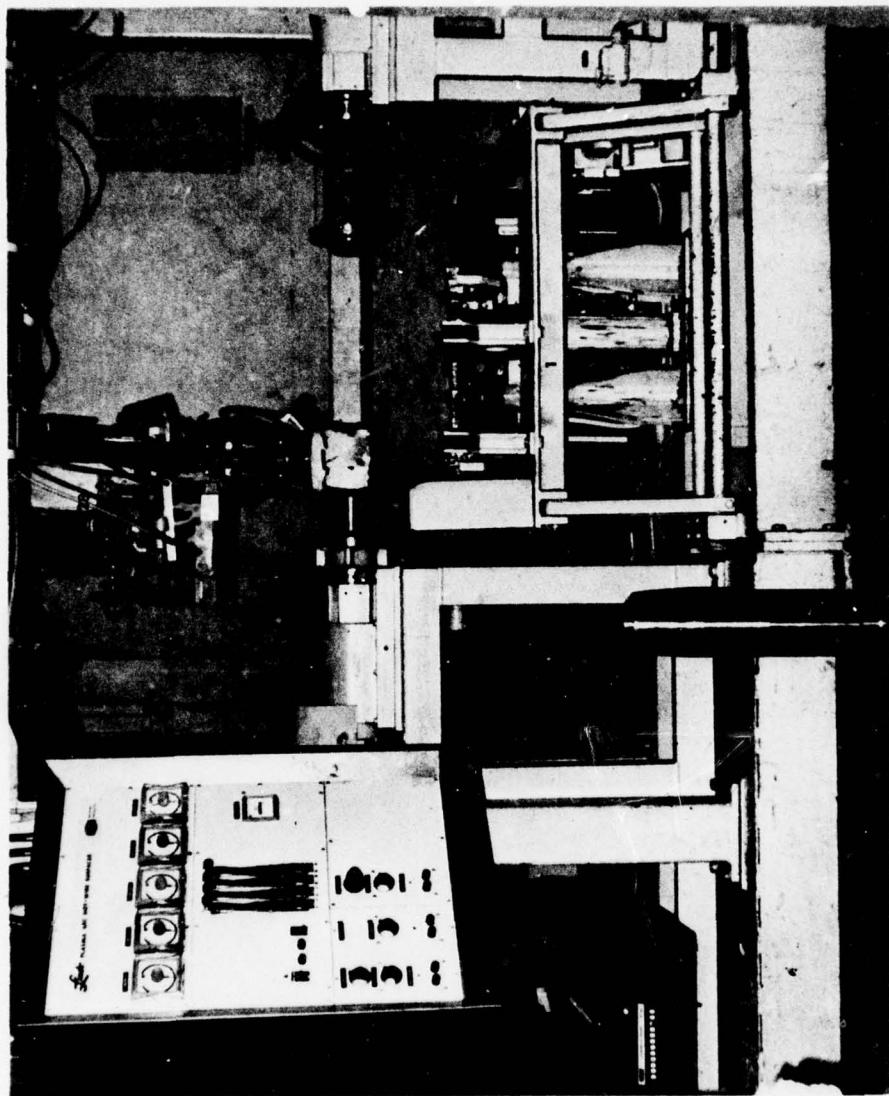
Front View of PAHW Banding Machine Showing Projectile Transport System and Tooling.
